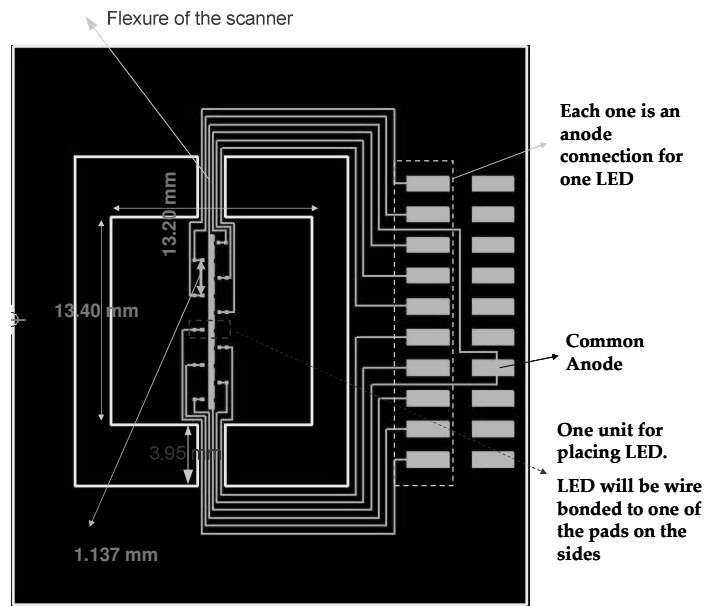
ORCAD PCB Layout of the Designed Scanner with wirings for driving 10 LEDs independently
